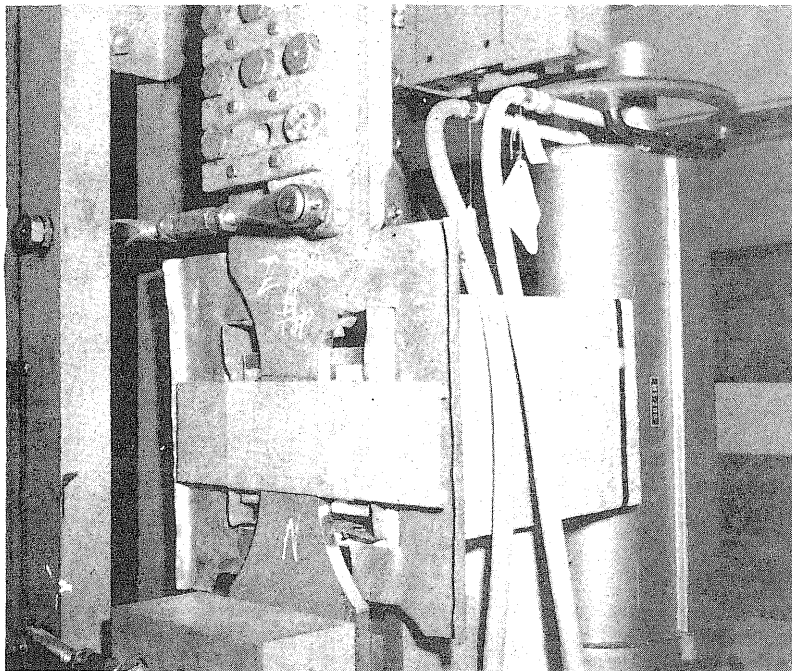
ILLINOIS' FATIGUE TESTING MACHINE AS USED FOR AXIAL LOADING OF WELDED JOINTS
